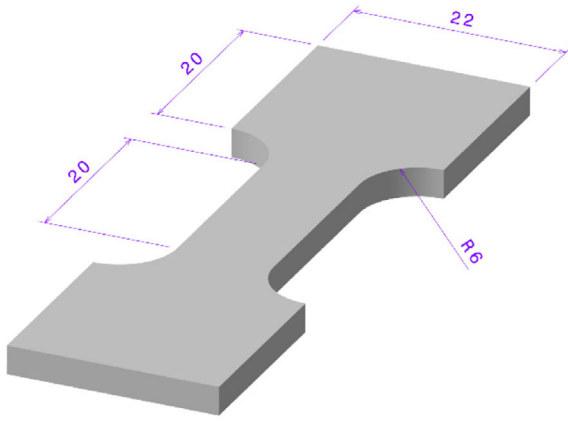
Specimen geometry and its related dimensions (in mm) for tensile and fatigue tests [Color figure can be viewed at wileyonlinelibrary.com]
